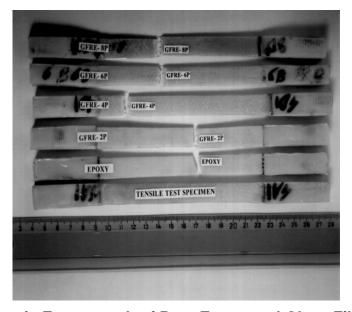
Macroscopic Fractograph of Pure Epoxy and Glass Fiber Composites.
